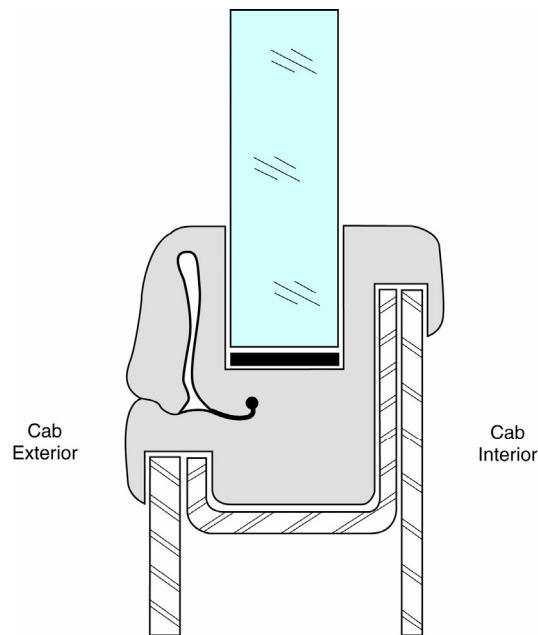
Sectional view of the assembled gasket with single loop cutting wire
